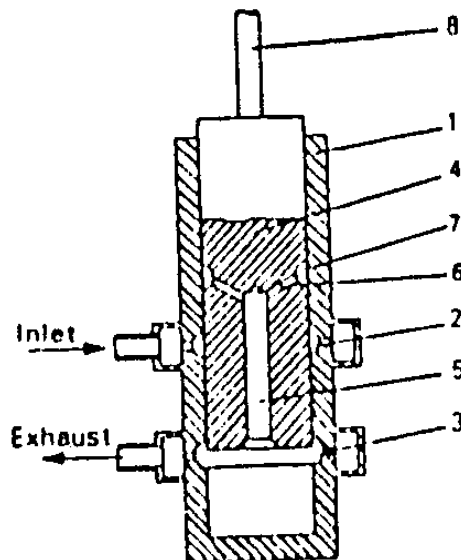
Simplified cross section of Doll-Eder valveless gas lubricated piston expansion engine.
